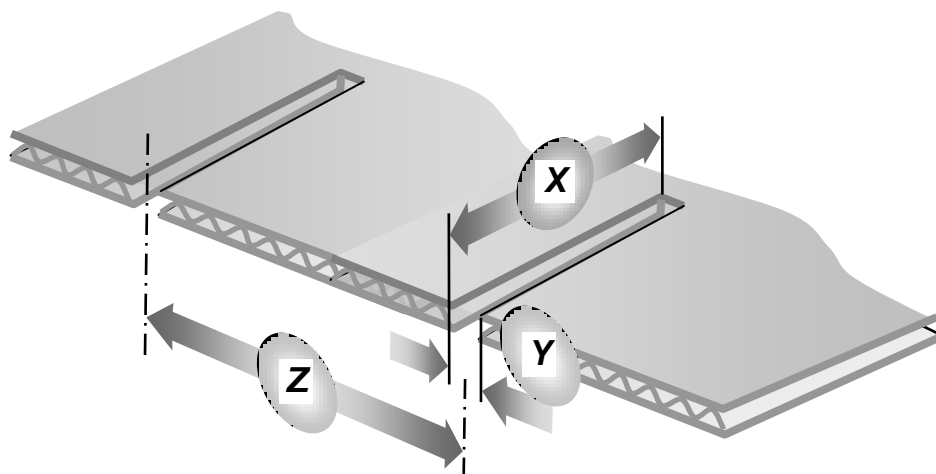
Changeover parameters of devise tool during manufacturing of large-sized cut-outs made of corrugated fibreboard
